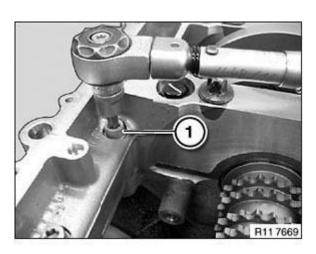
Tightening Bolts Using Special Tool Courtesy of BMW OF NORTH AMERICA, INC.
